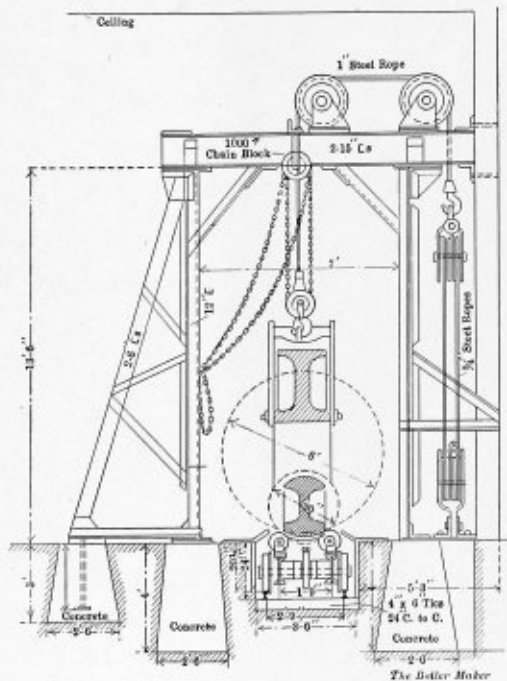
END VIEW OF SUSPENDED RIVETER.
